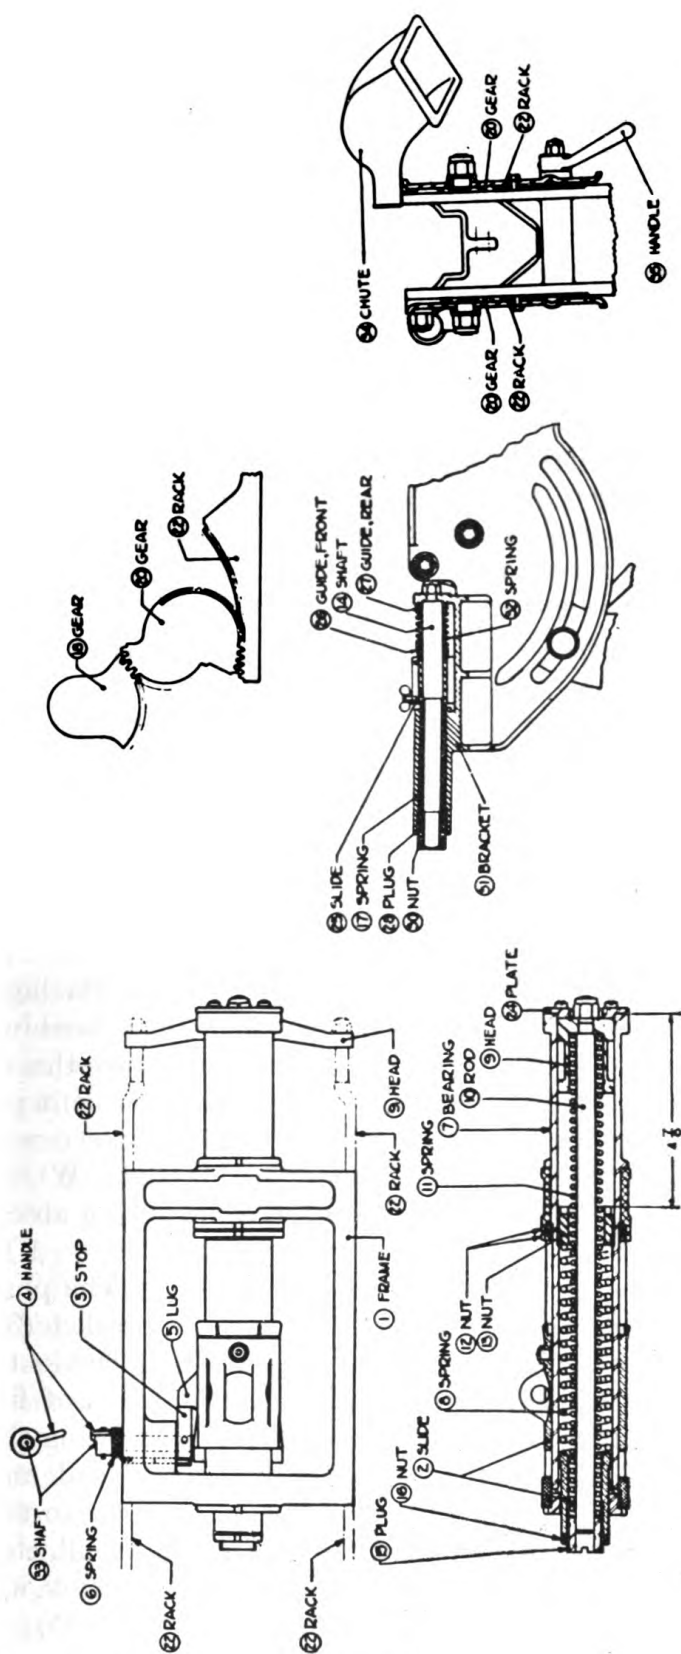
Antiaircraft machine-gun mount, caliber .50, M2, recoil mechanism.
